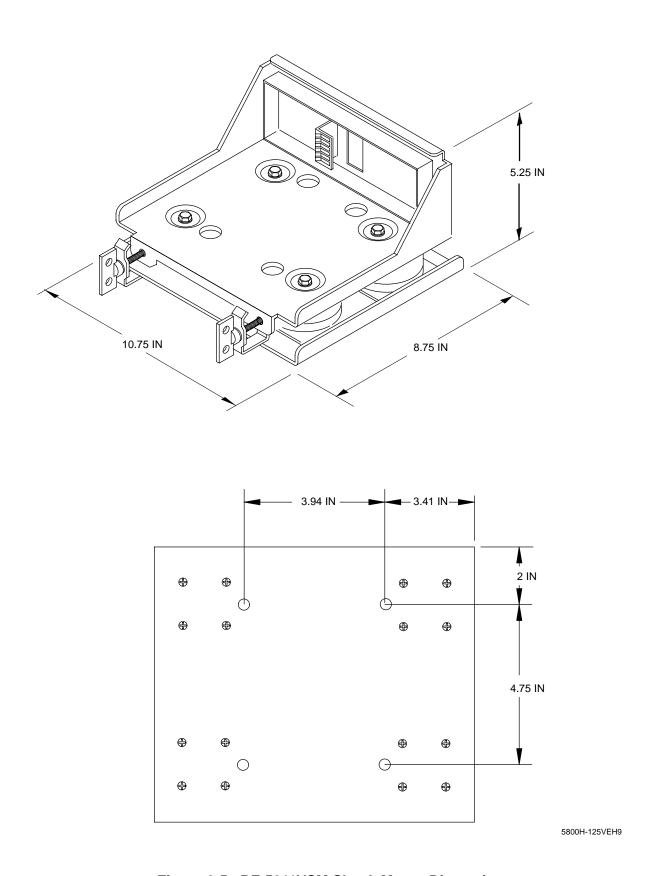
RF-5211VSM Shock Mount Dimensions
